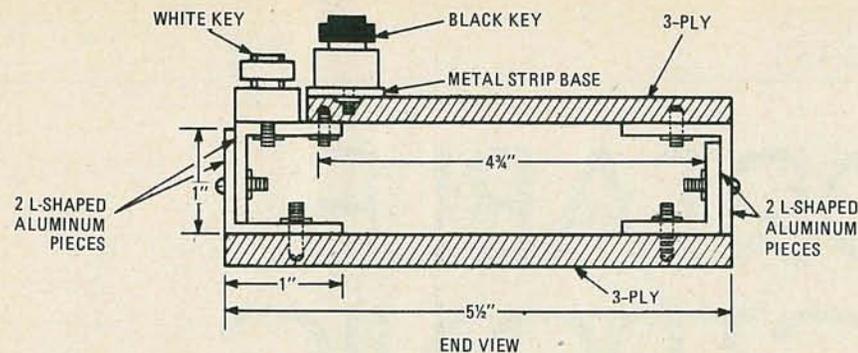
PUTTING THE ORGAN TOGETHER. Drawing shows mechanical cross-section. Keys are mounted so the black ones are higher and farther back than the white ones; as on a piano keyboard.
